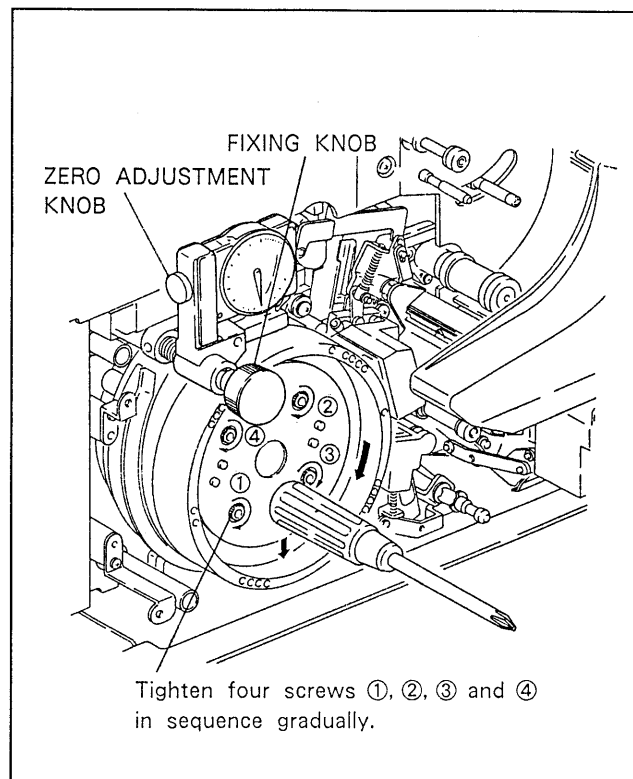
Upper Drum Installation (Final Tightening)
